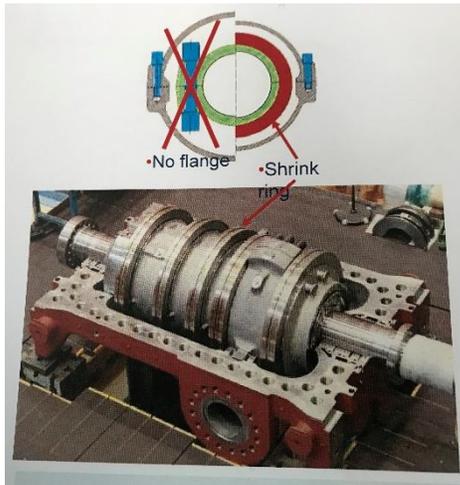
Shrink ring HP turbine inner casing (Courtesy GE)
